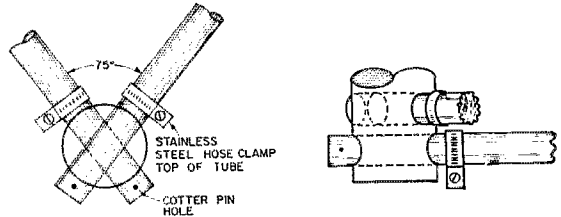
This drawing shows the method of mounting the element to the boom. A cotter pin is used on the under side of the boom and a hose clamp on the top to hold the element securely to the boom.
